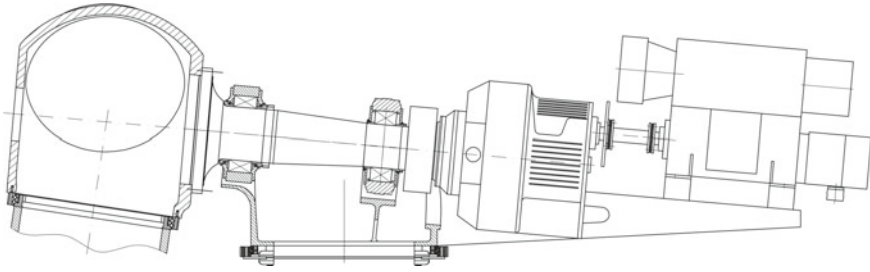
Rotor shaft with two individual bearings [aerodyn]
